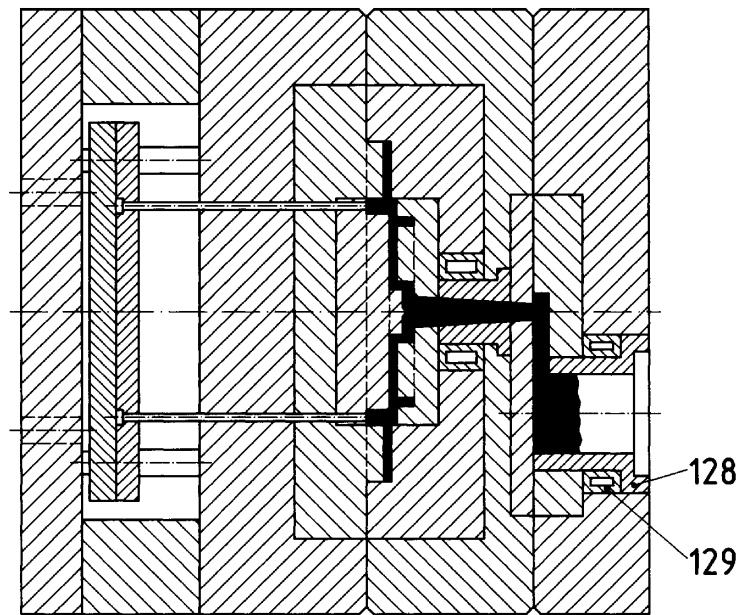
Diecasting die for cold-chamber diecasting machine with horizontal pouring sleeve, three-plate construction
